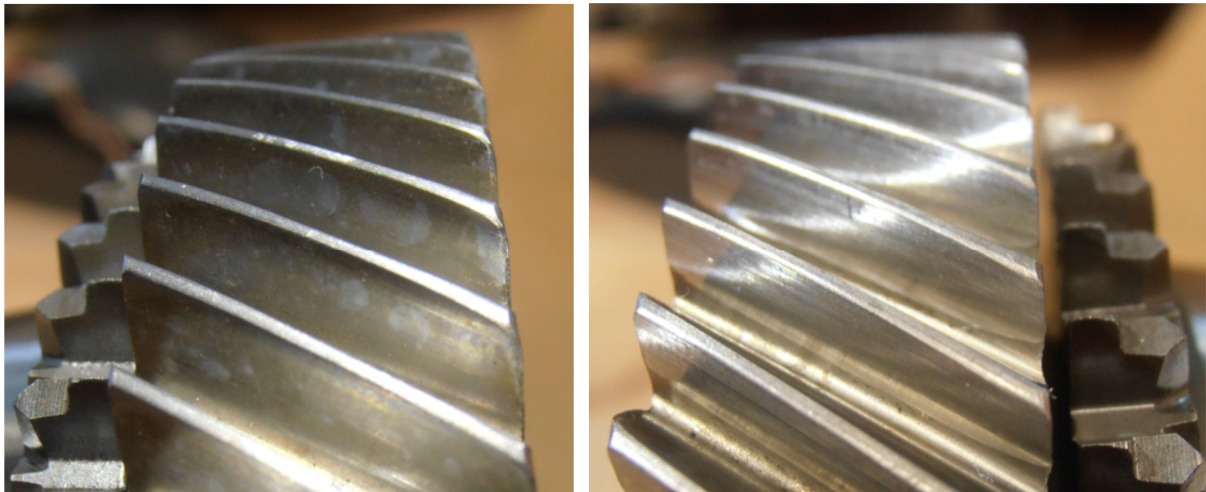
Large gear ($z=48$) after coast flank grinding. Original rolled (not ground) drive flank (left), ground coast flank (right).
